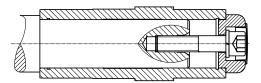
Gear unit mounted to shaft with a shoulder using the fastening element
